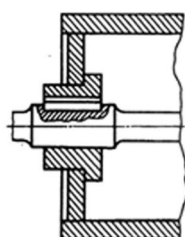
Hatching when drawing a welded, soldered or glued product made of homogeneous material
